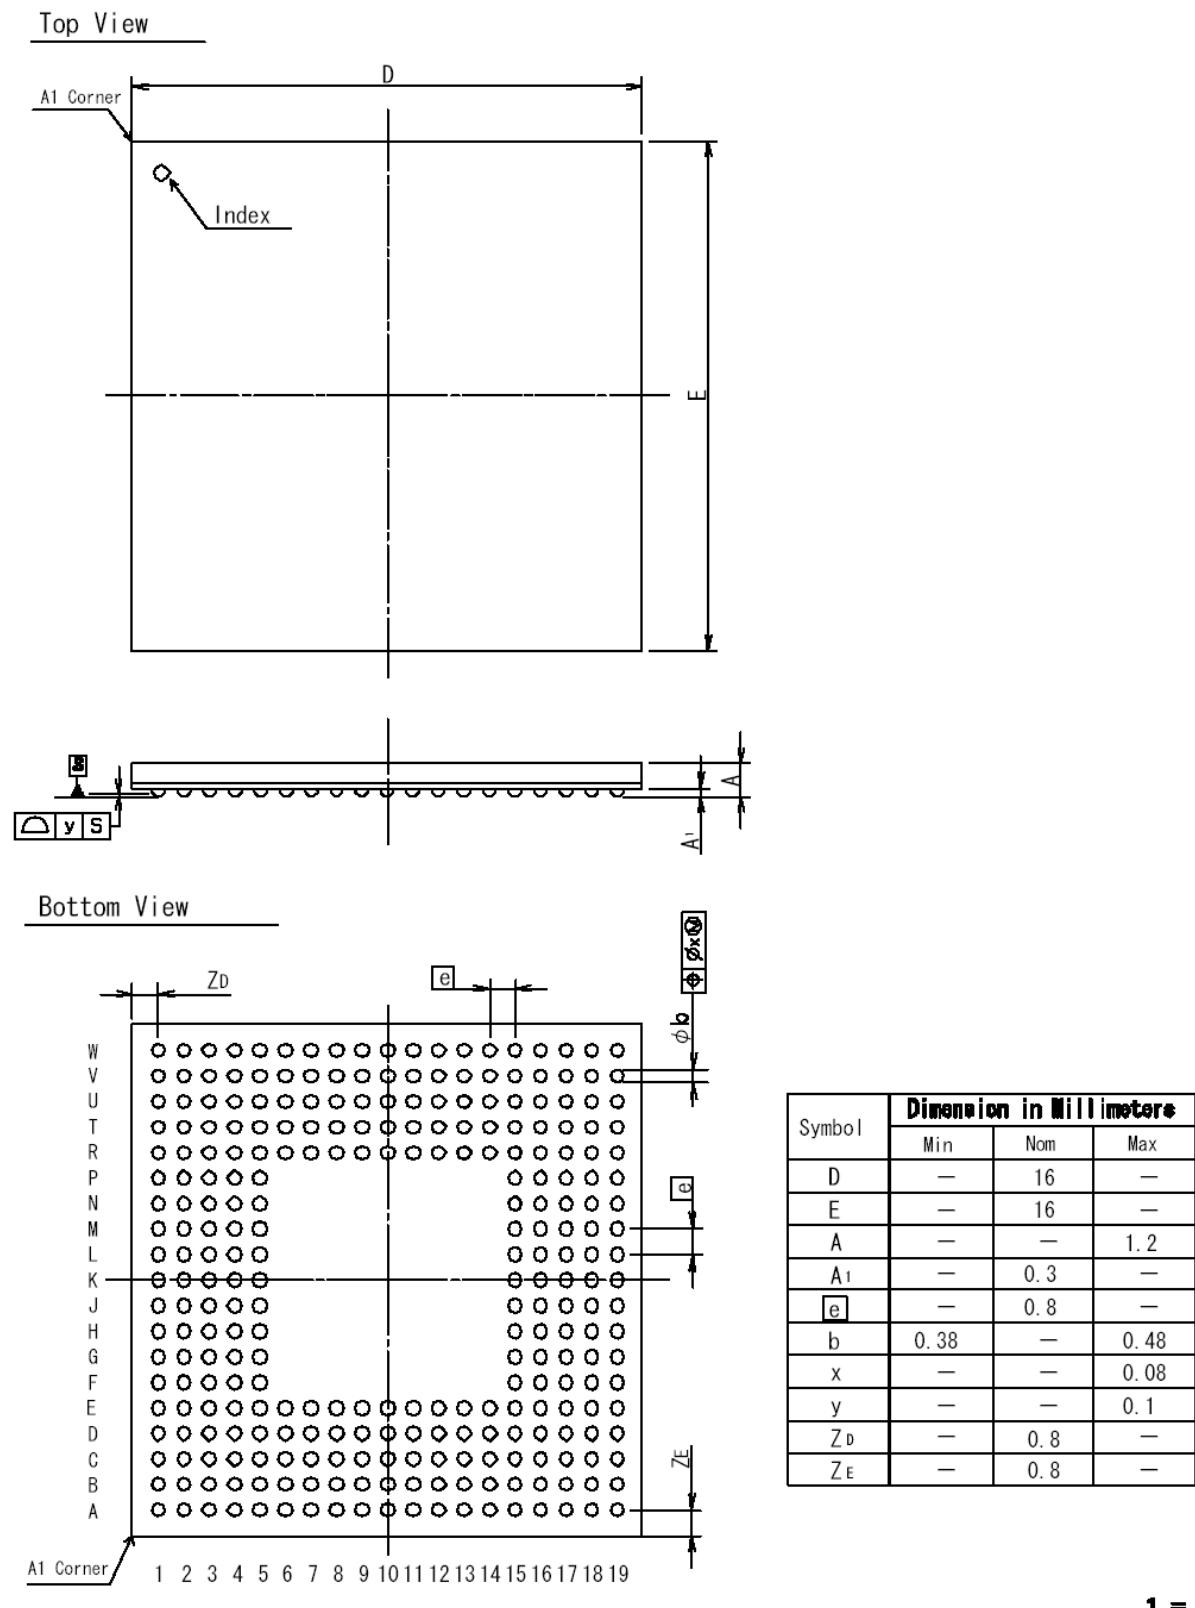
Package Dimensions (PFBGA16U-280PIN)
